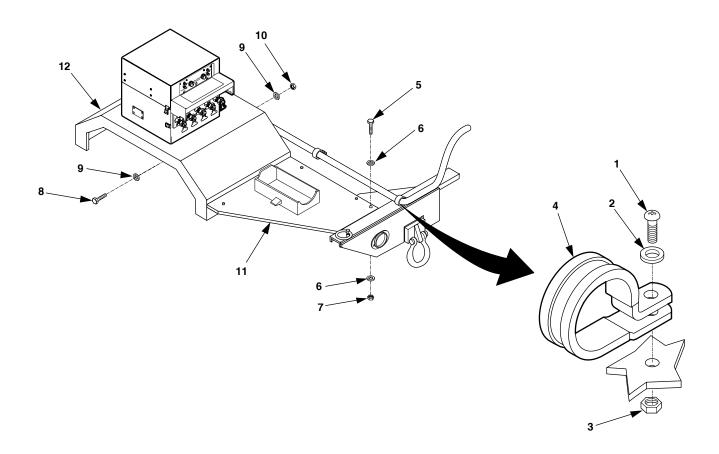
AN/MJQ-35 Roadside Fender Assembly Removal.
